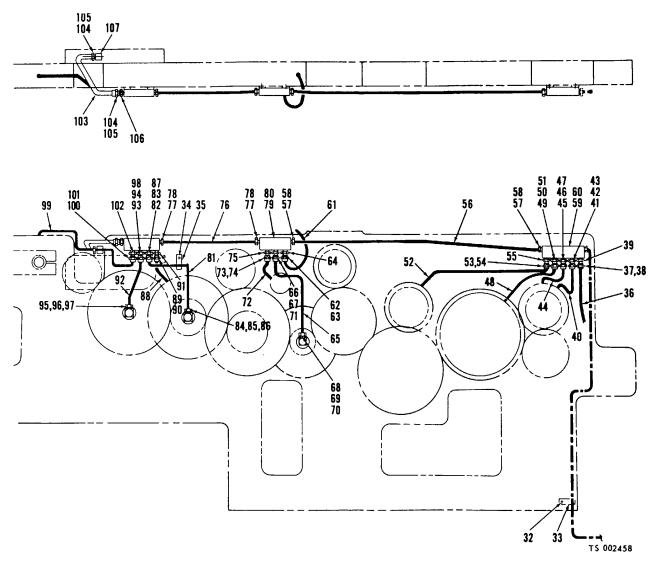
Delivery unit oil line assembly (Sheet 2 of 2) 4-34
